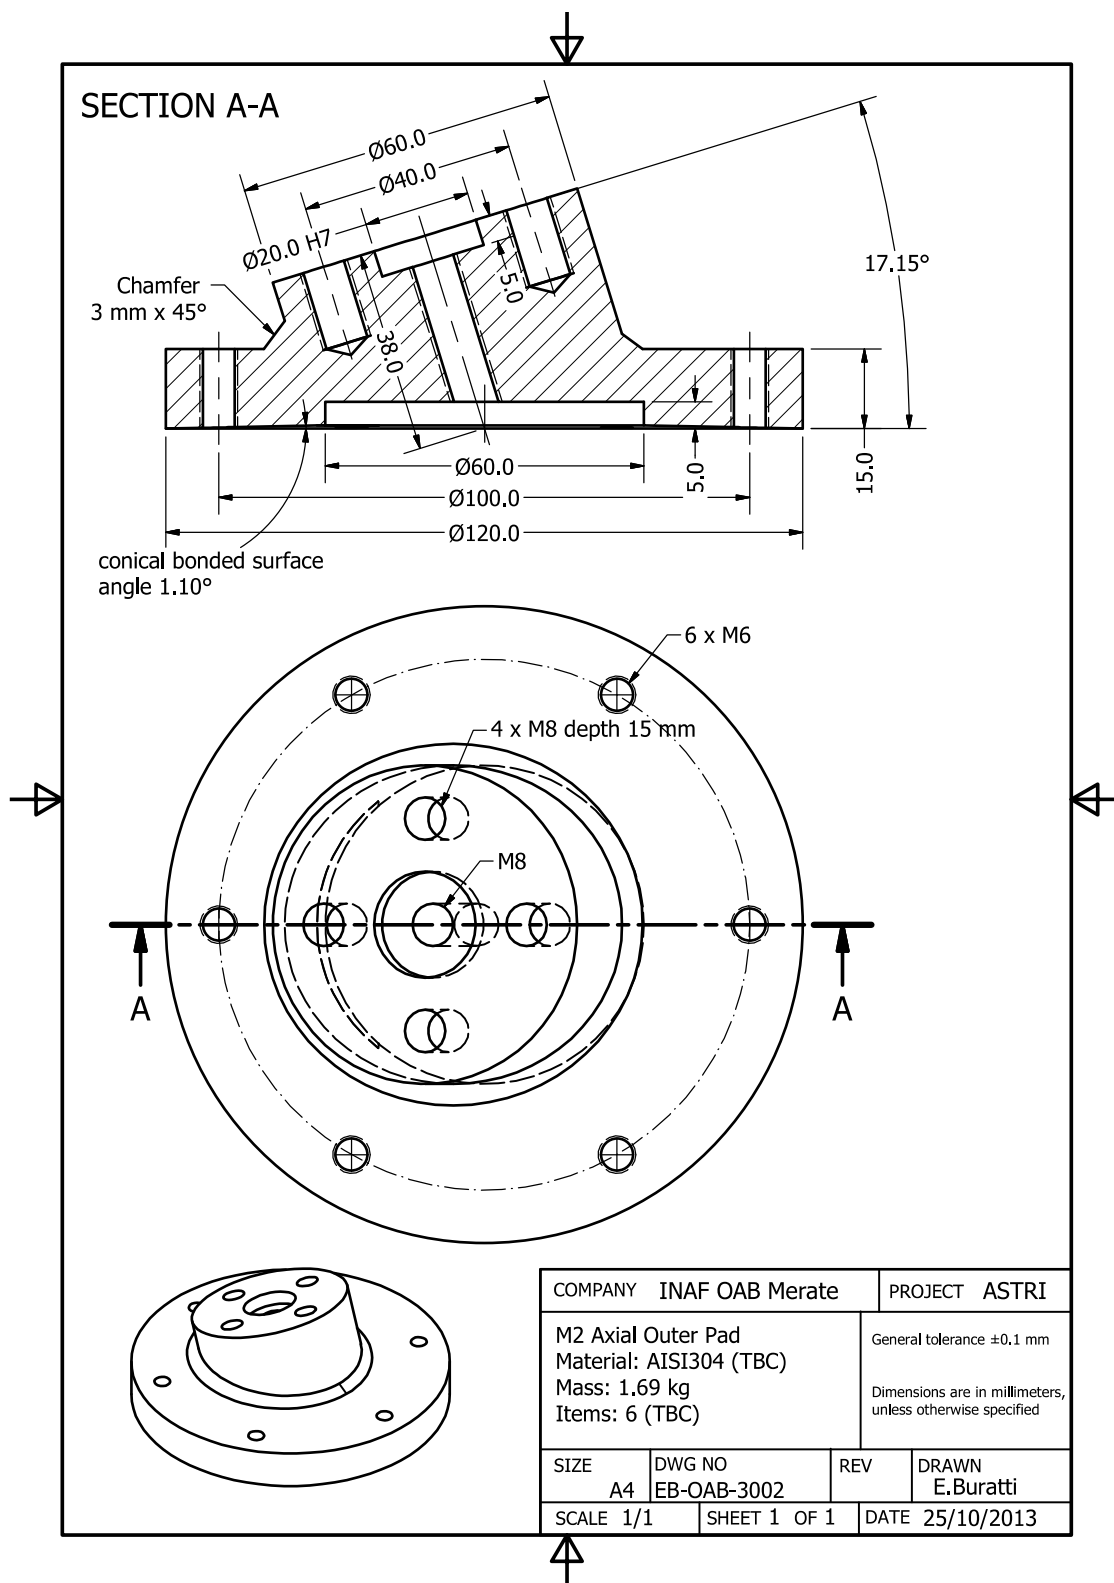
Mechanical drawing of the axial outer pad, ASTRI-INAF-DWG-7222.200-01 (formerly EB-OAB-3002).
